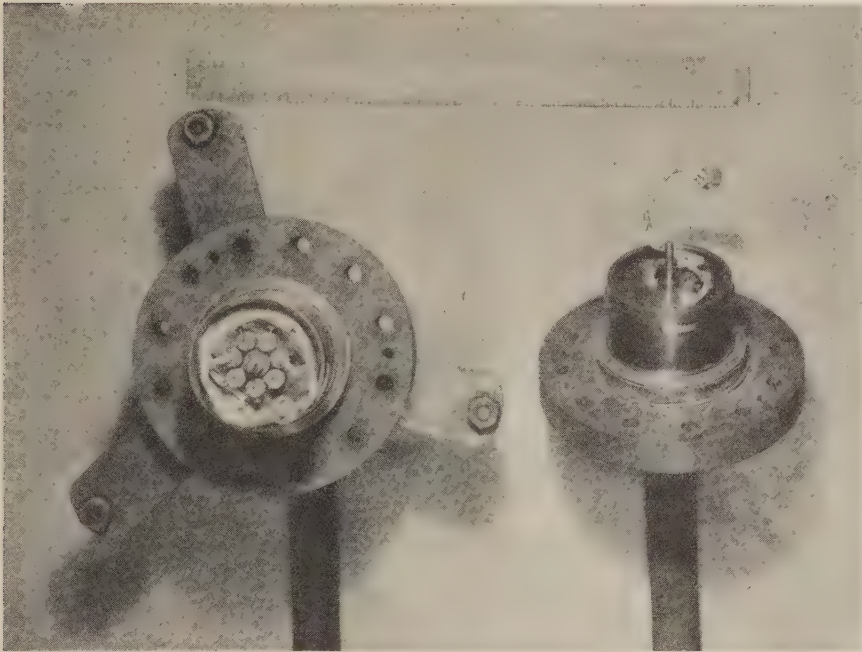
END PLUGS AND END-LEAKAGE COUPLES
